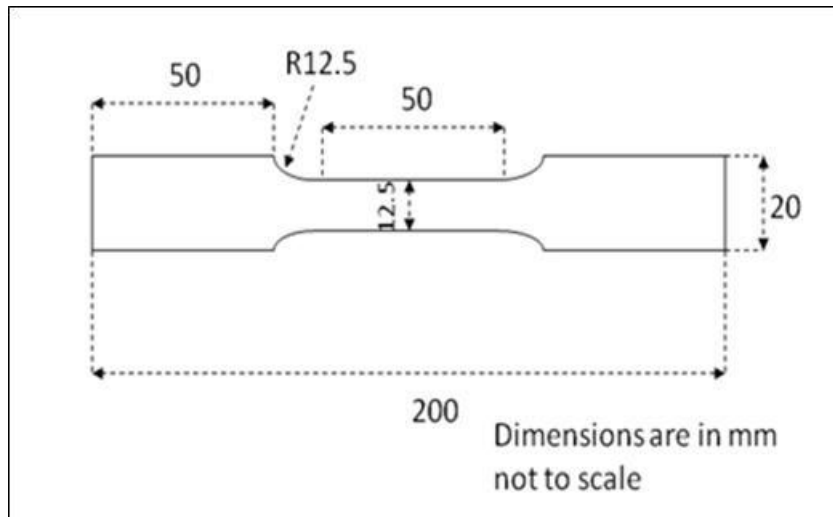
Dimensions of Tensile specimen (ASTM E8)
